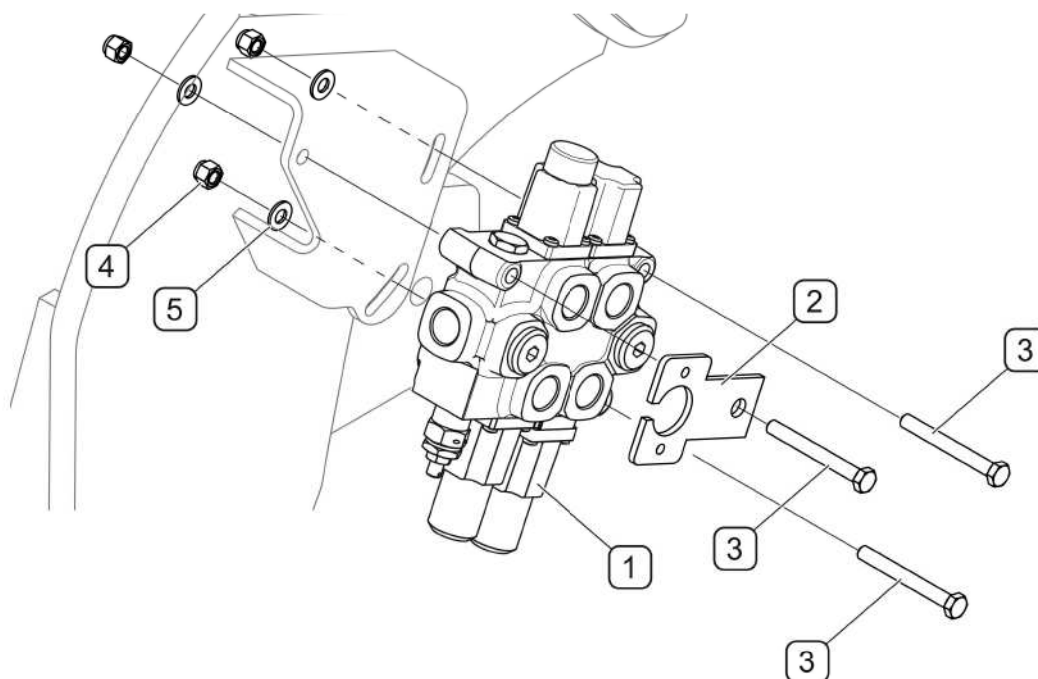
AND Installation of the hydraulic selective control valve on arm support
